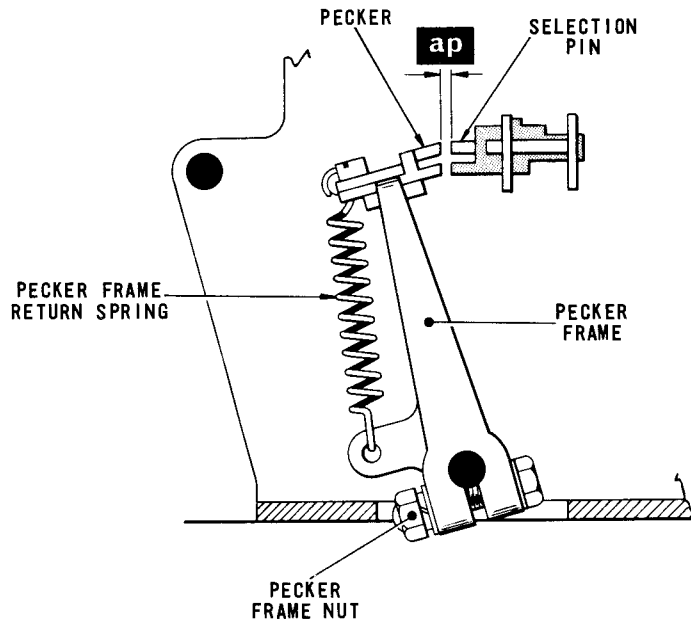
PECKER/SELECTION PIN CLEARANCE
